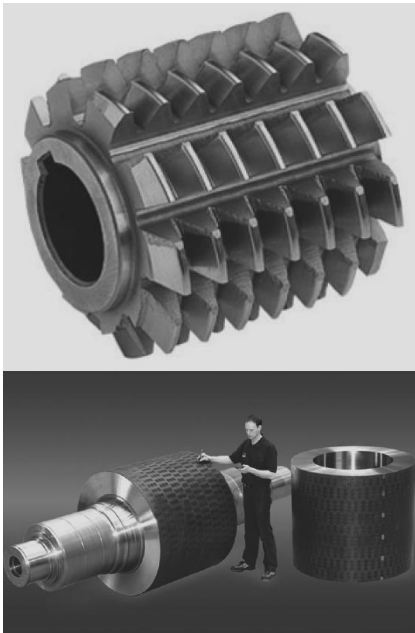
Top: HIPped high speed steel automotive gear cutter (courtesy Erasteel); bottom: tool steel clad grinding roll for cement processing impeller (courtesy Köppen)
